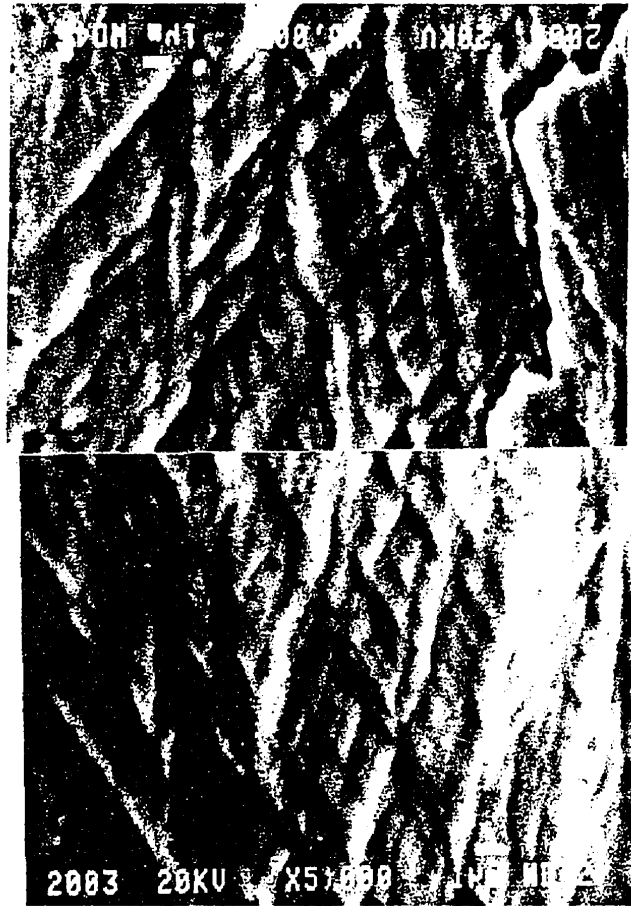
Matching fractographs of enlarged “A” region in Figure 6.11. Microfacets match and interlock on the two fracture surfaces.
